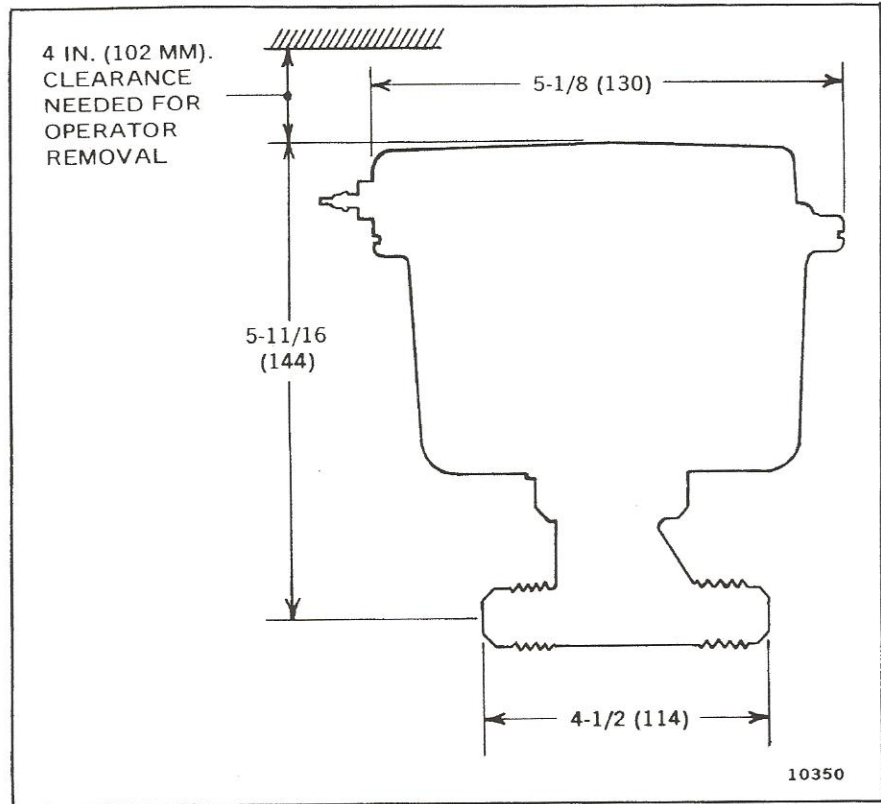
VP513A APPROXIMATE DIMENSIONS IN INCHES (MILLIMETERS)
